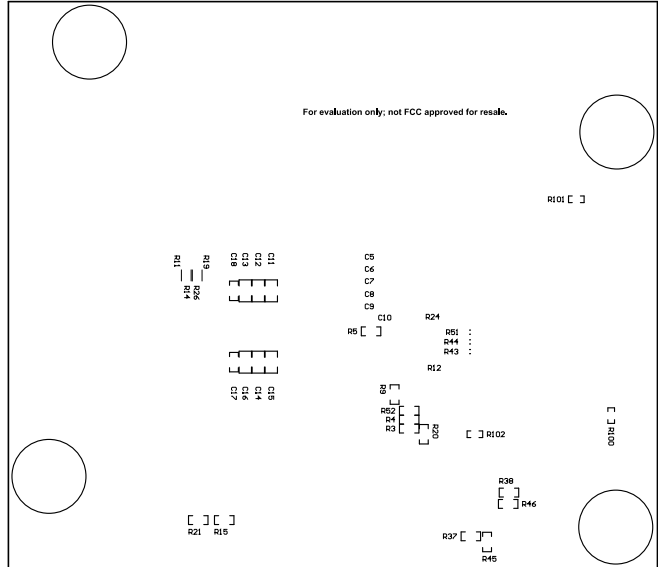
TPS544C26EVM Bottom Composite View (Viewed From Bottom)
